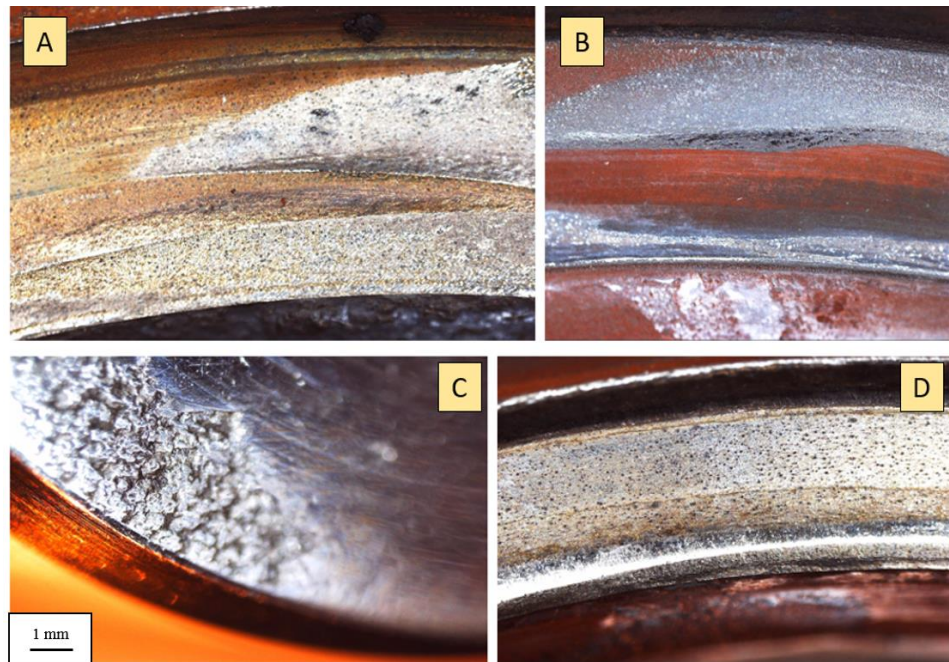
Detail of ADI 280 intake valve seat after engine dyno test
